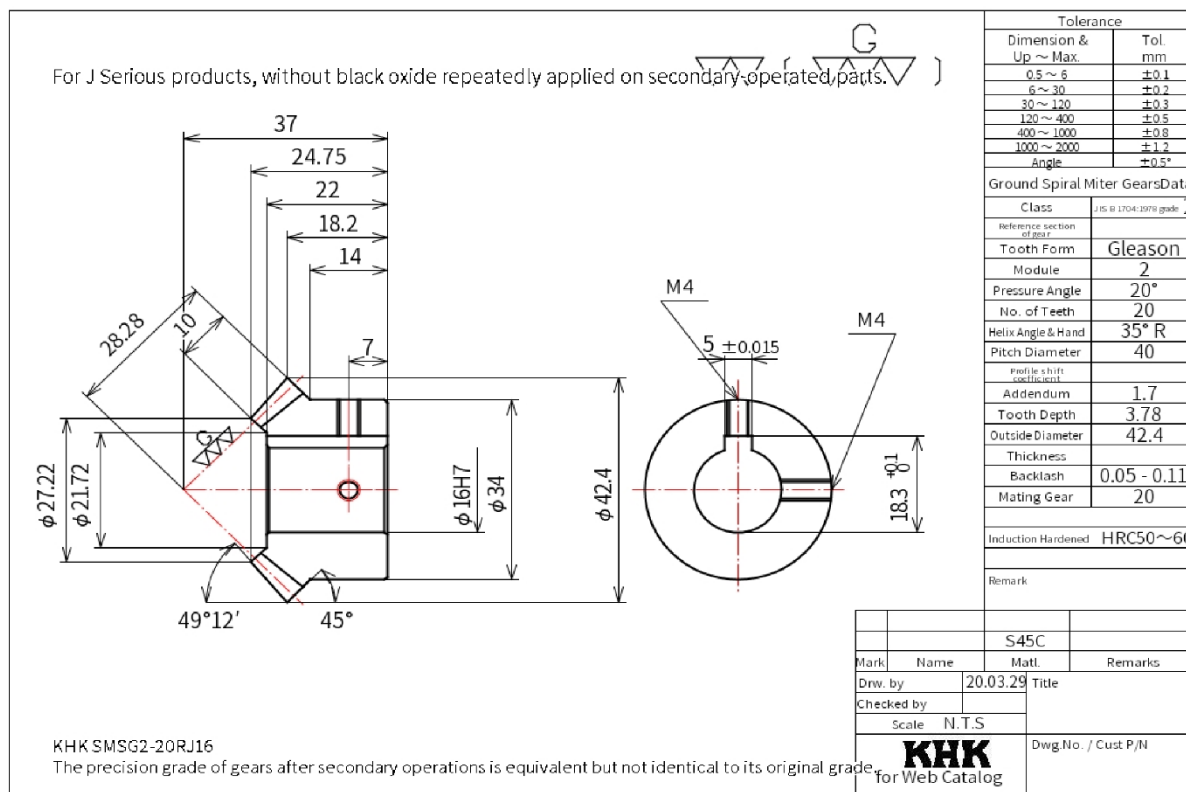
KHK SMSG2-20RJ16 gear dimensions
